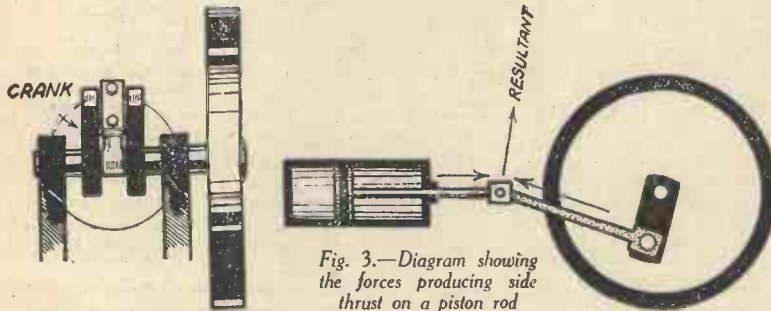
Diagram showing the forces producing side thrust on a piston rod
